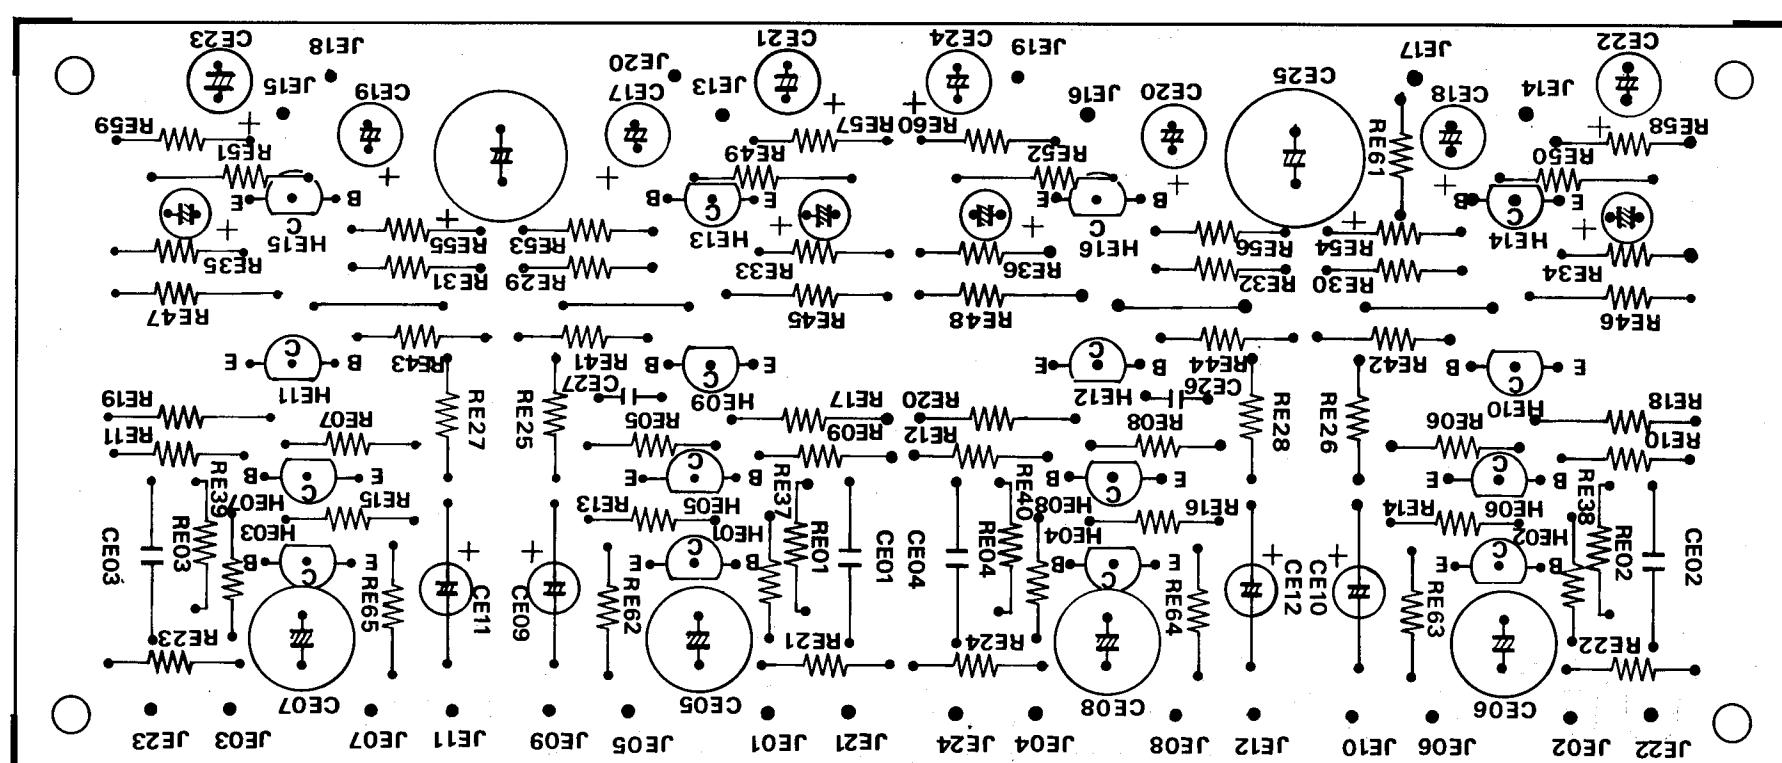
Buffer, Pre-Amplifier Assembly PE01 Component Locations
